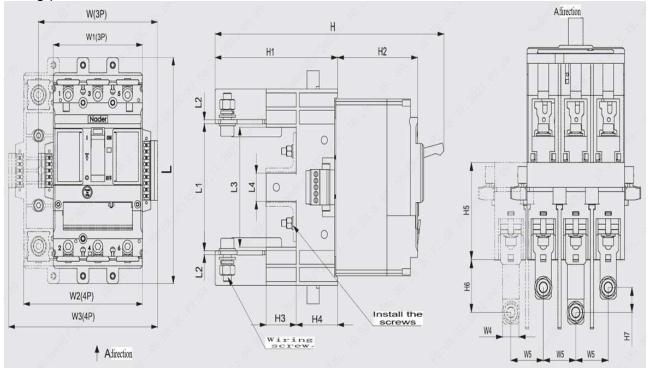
3P, 4P Outline dimensions of plug-in board rear wiring products
